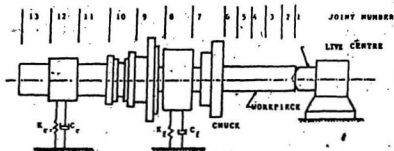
Schematic Model of a Lathe Spindle-Workpiece System
